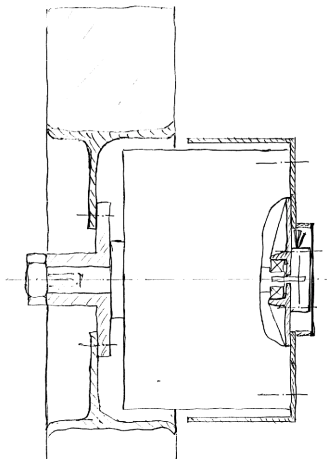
Part of the motor is placed inside the wheel rim (top view).
